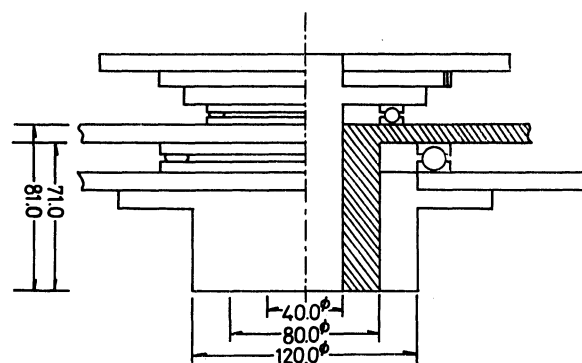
Cross section of rotating shaft of grating drive mechanism.
